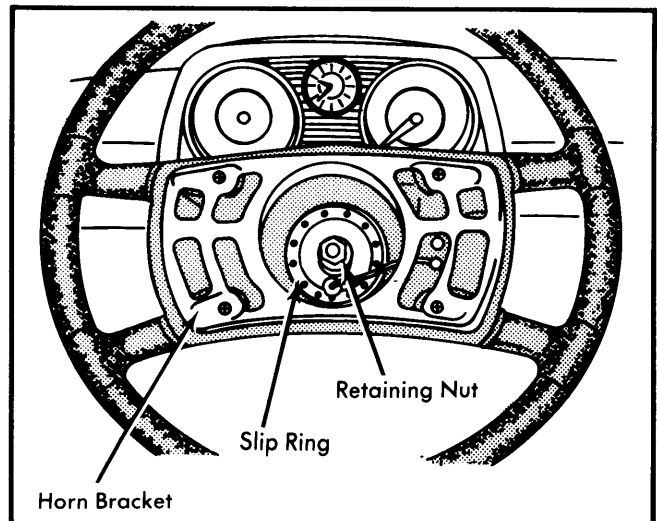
Mercedes-Benz Steering Wheel with Cover Removed
